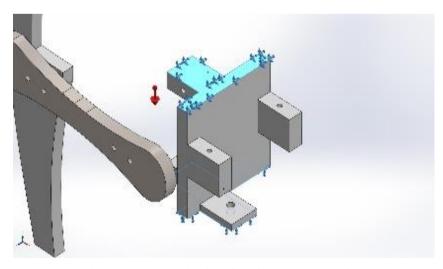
27 Leg Assembly Showing Fixtures For Analysis
